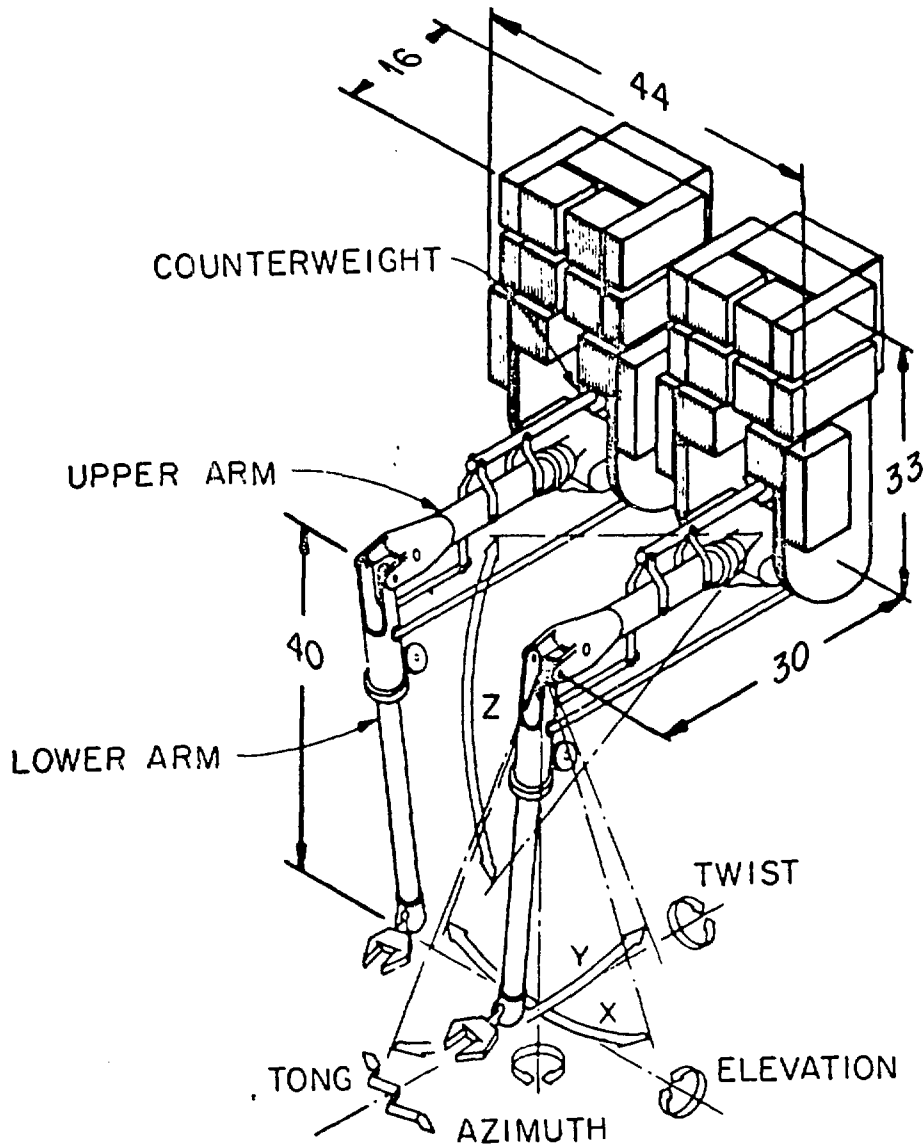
ARGONNE MARK E4A SLAVE MANIPULATORS. 2
